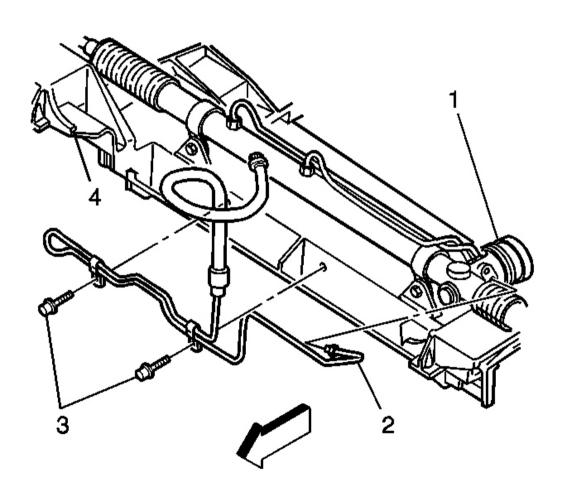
Power Steering Return Hose, Power Steering Gear & Bolts Courtesy of GENERAL MOTORS CORP.
